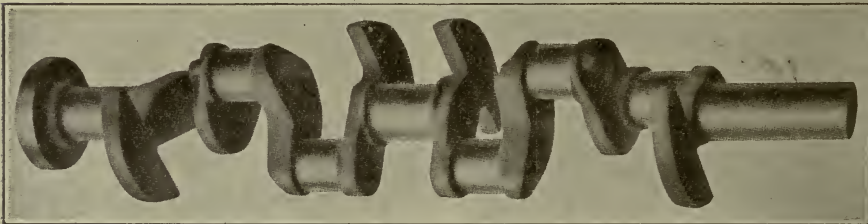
Three Bearing, Six Throw, Counterbalanced Crank Shaft.
